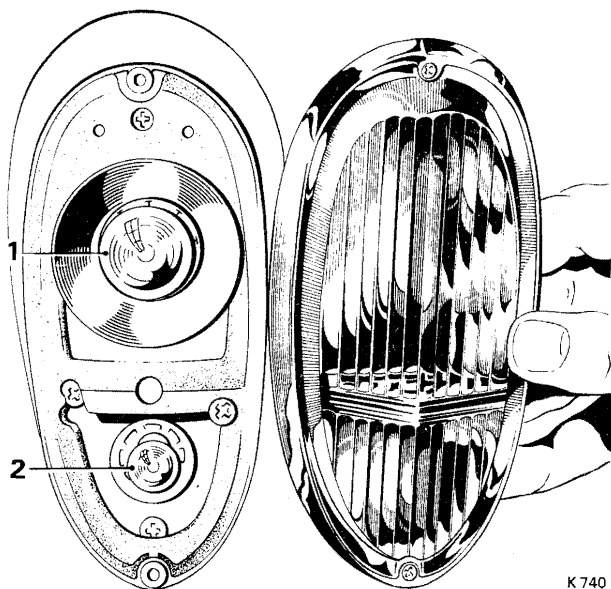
ACCESS TO SIDE/DIRECTION INDICATOR BULBS
